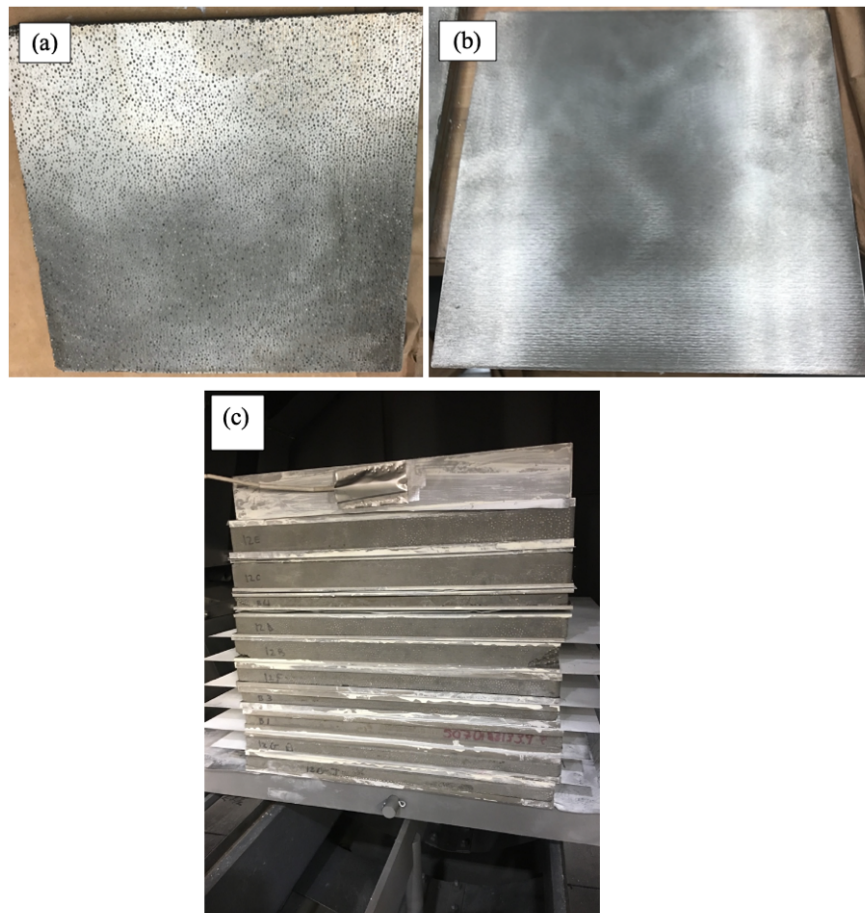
Digital images of (a) the top surface of a SS-CMF panel after grinding (b) the top surface of a steel face sheet after grinding, (c) a stack of 10 SS-CMF panels and 20 steel face sheets under a weight with a thermocouple attached to it inside of a vacuum furnace, ready for diffusion bonding to SS-CMF core sandwich panels.
